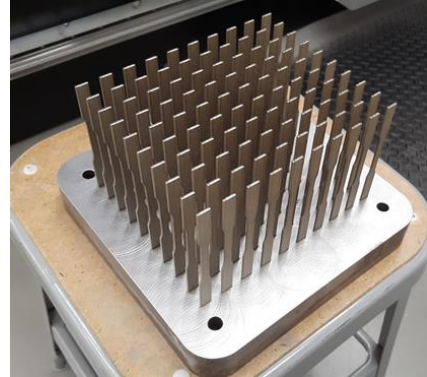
shows a successful print (without any machine pauses during the build, or defective specimens) for 2 mm thick vertical specimens with the optimized parameters. Similar prints were conducted all three layer thicknesses. There were no visual defects observed for any of these builds. Specimens were labeled using the mass label in Magics software to ensure traceability, using similar methods to those discussed previously. A total of 300 specimens, 100 for each of the three layer thicknesses, were obtained after wire EDM process and then were tested to get properties. Once again, these were not subjected to any heat treatment or post-processing steps prior to testing.
